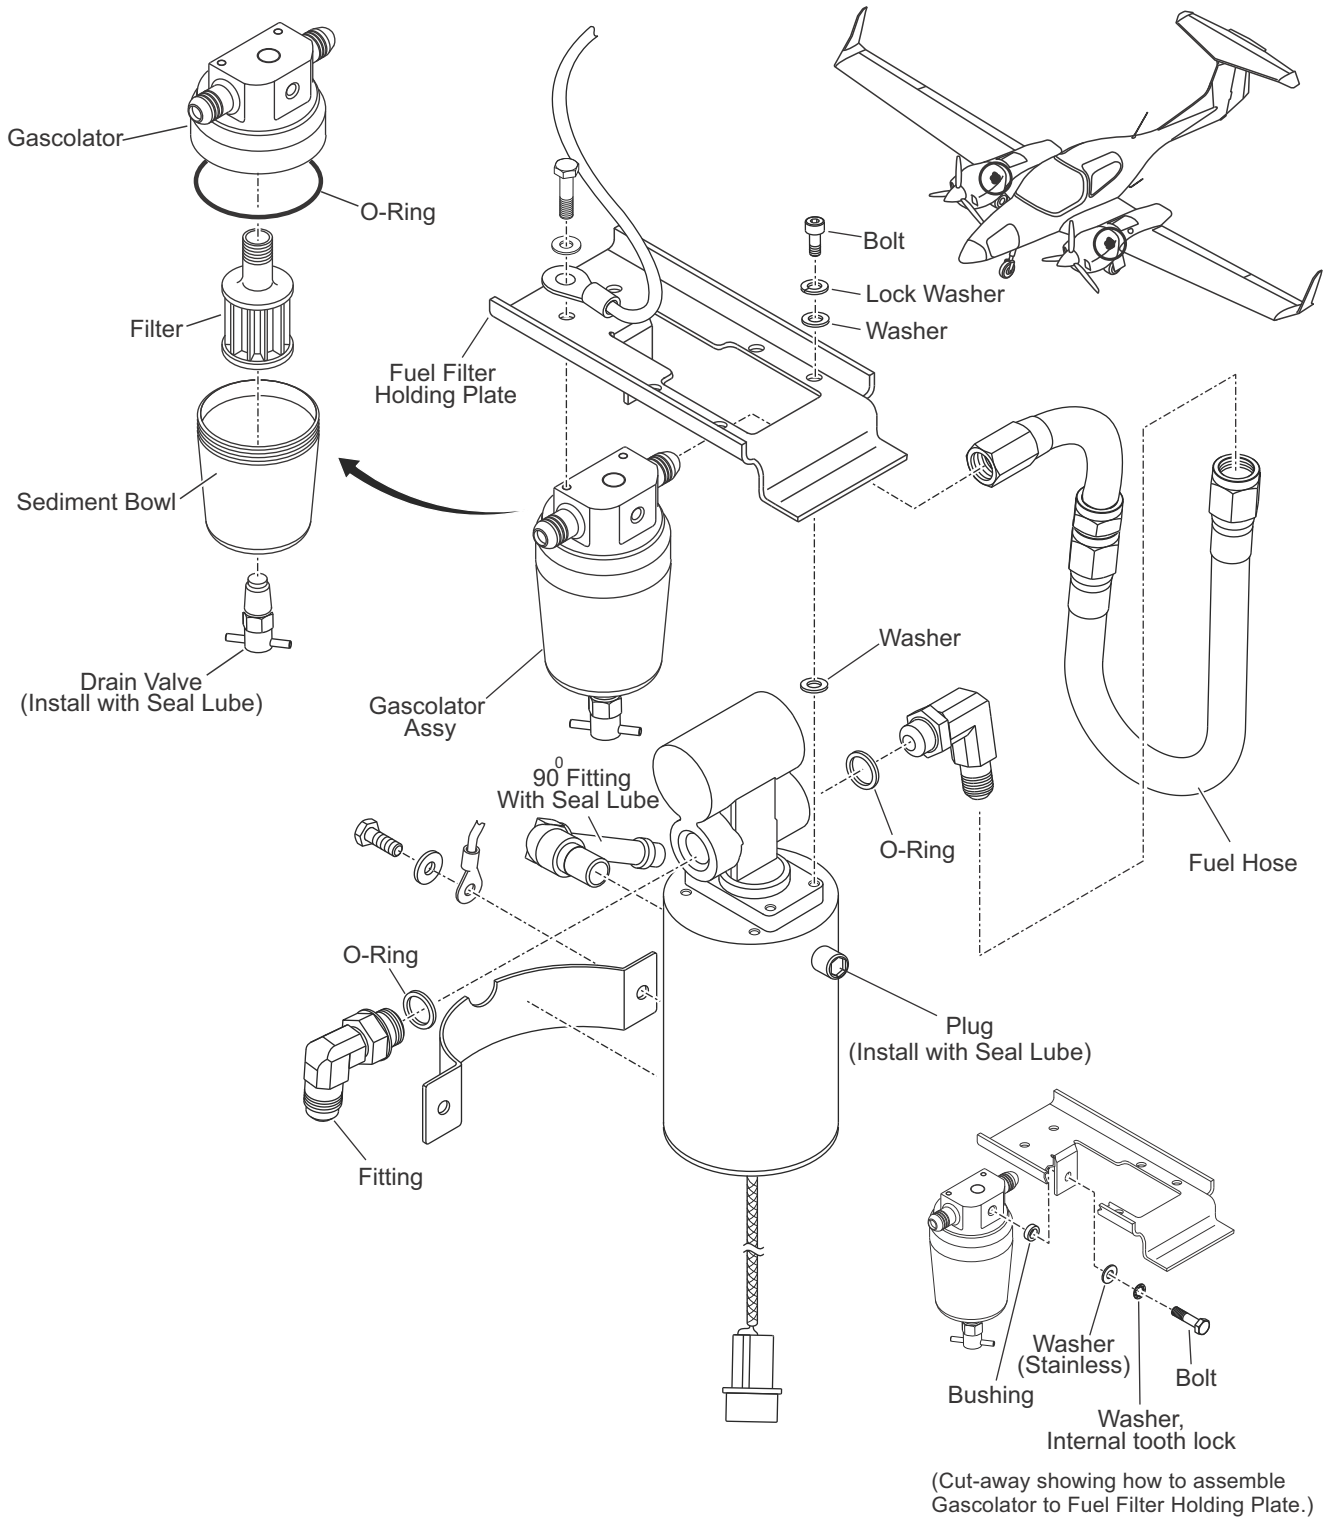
Fuel Pump and Gascolator Assembly (LH)
